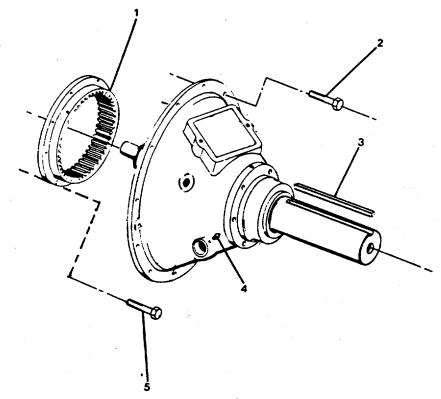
Power Takeoff Assembly (SL-111 HP2).
